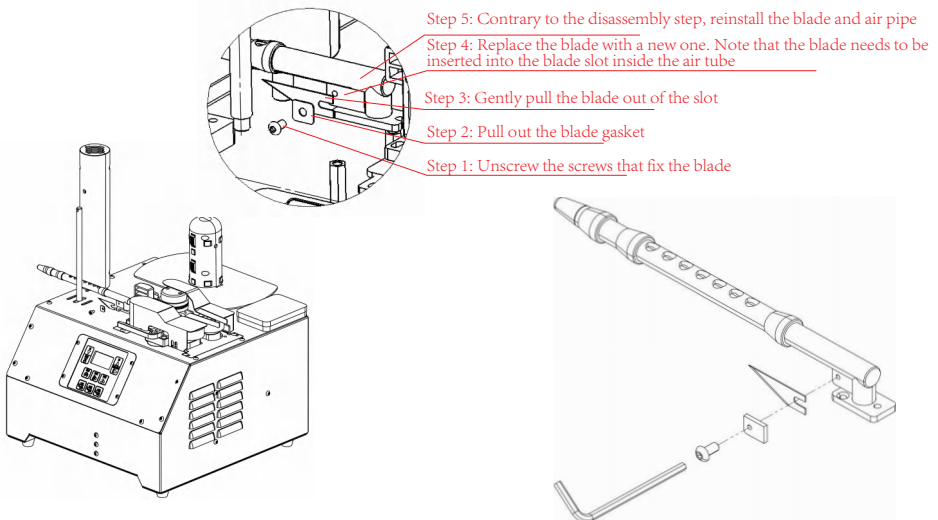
(Schematic Diagram of disassembly and installation of air pipe and blade)
